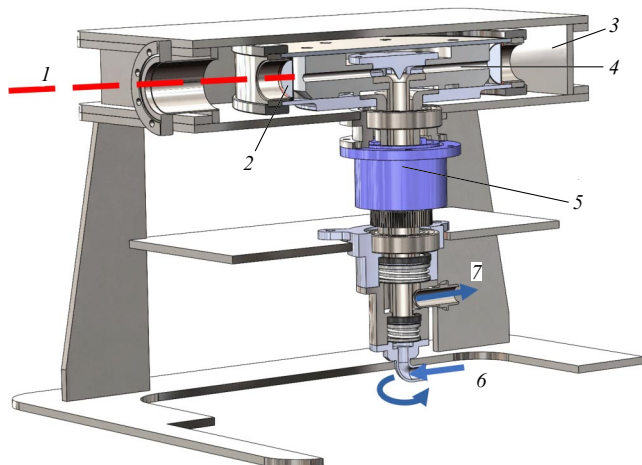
Design of the rotating disk target assembly with injection cooling: 1—proton beam, 2—target, 3—vacuum chamber, 4—water-cooled drum, 5—target injection cooling system, 6—water inlet, 7—water outlet.
